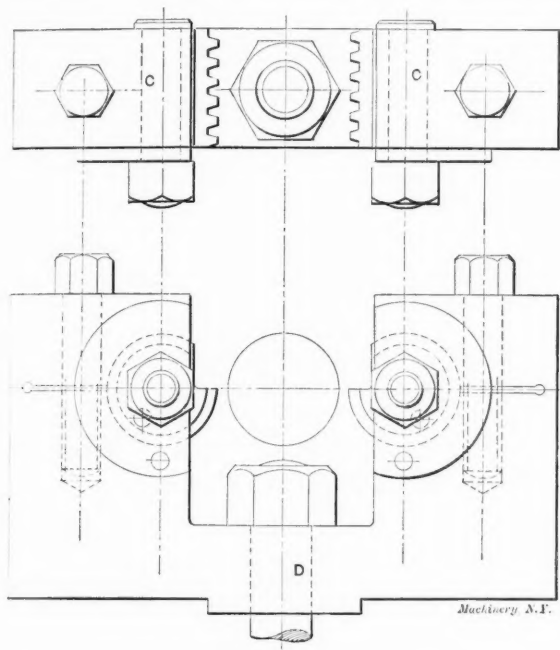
Double Tool-post with Circular-formed Threading Tool.
